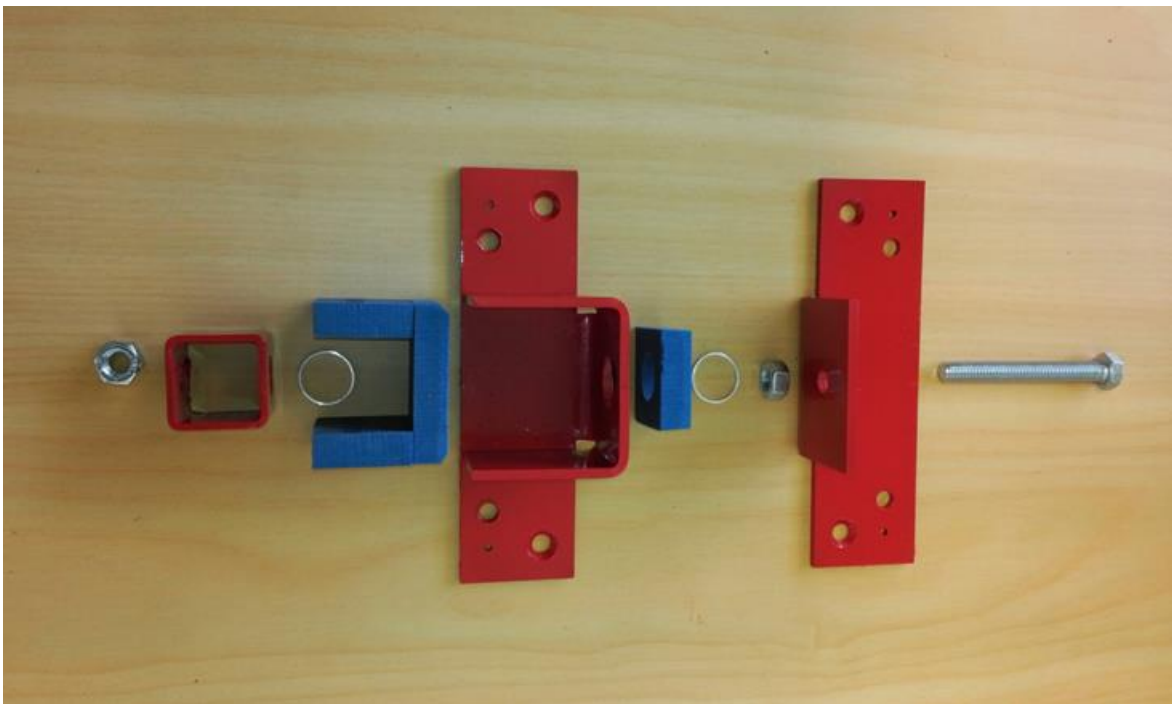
Exploded view of the parts of the connector, showing the assembly order.
